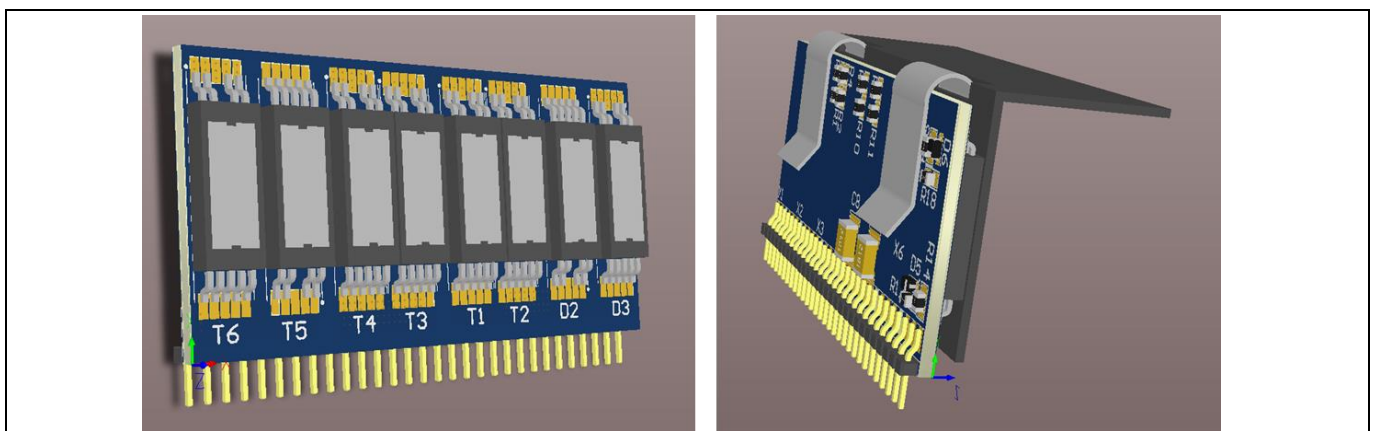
DDPAK module with TO-220 spring connection to copper cooling plate
